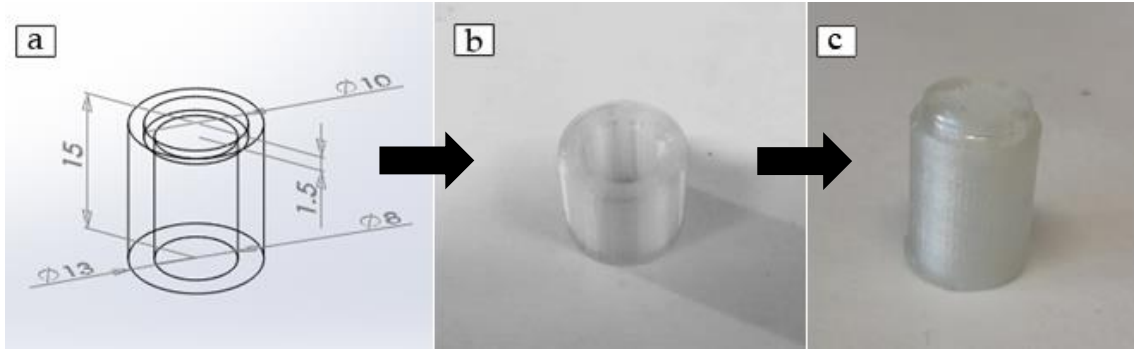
Sample holder (a) technical drawing, (b) 3D printed and (c) with a sample attached.
